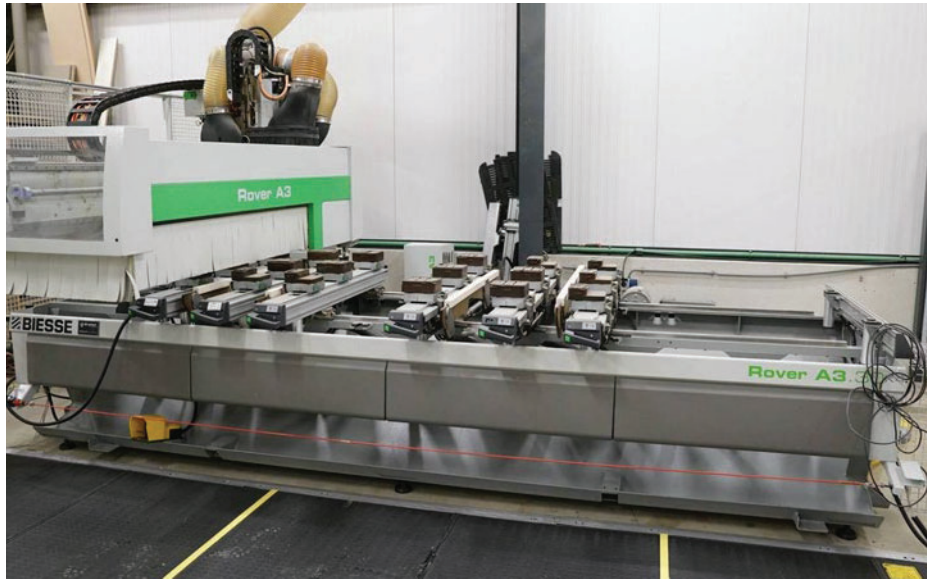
CNC milling and drilling center Rover A.3.30 (Biesse, Italy)
